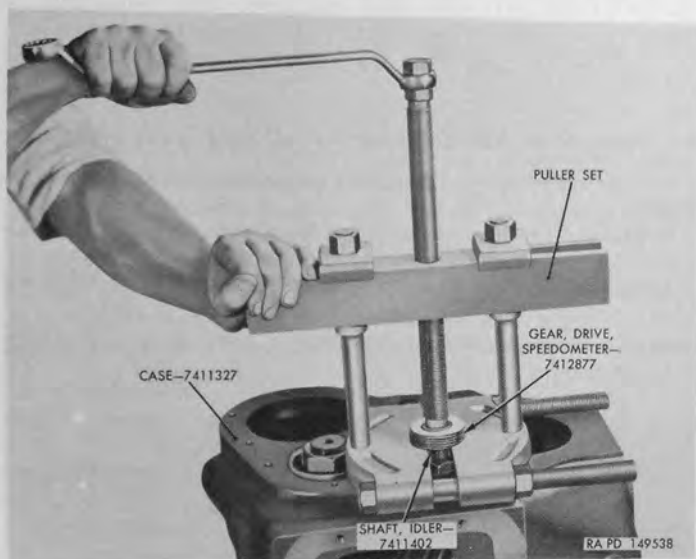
Removing speedometer drive gear using puller set 41-P-2905-60.
